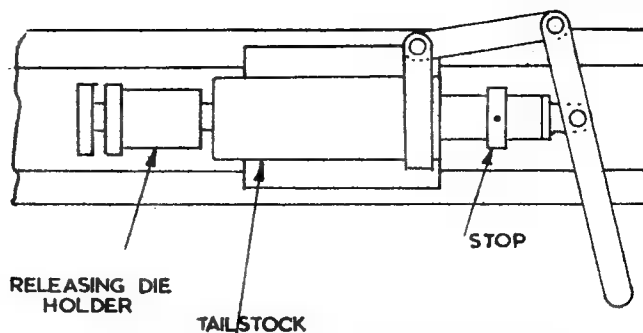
Lever feed and stop arrangement for lathe tailstock
